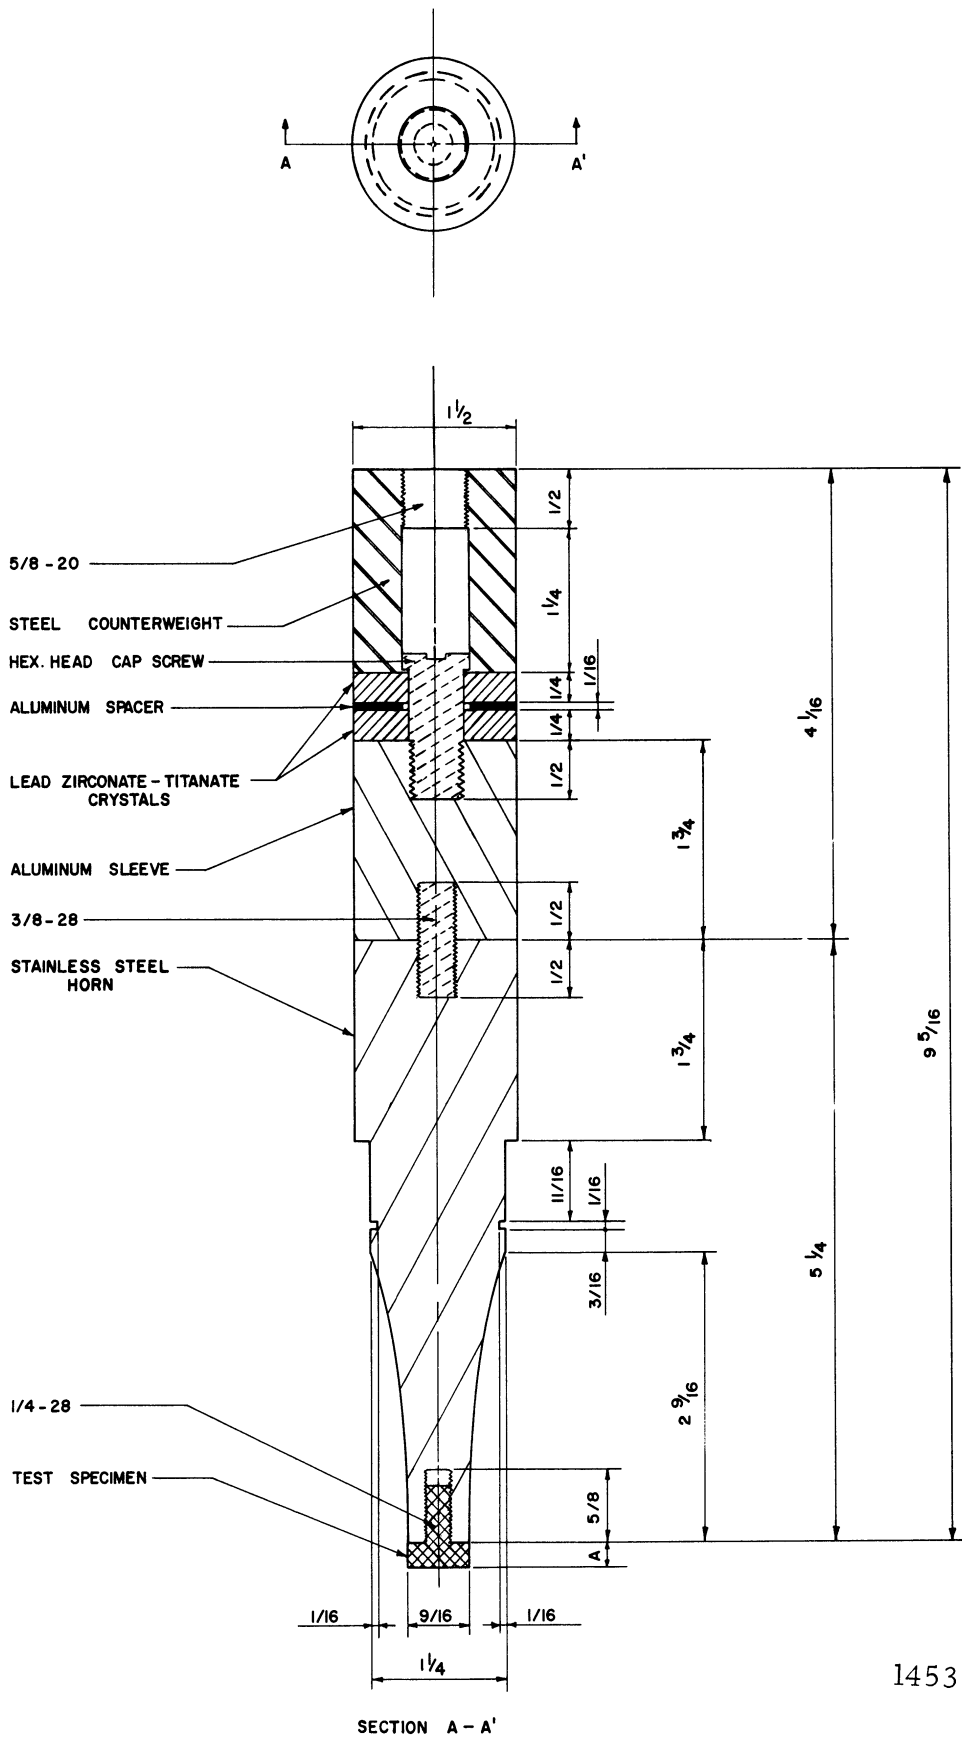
Diagram of Vibratory Horn Showing Horn Tip Attachment in Place
